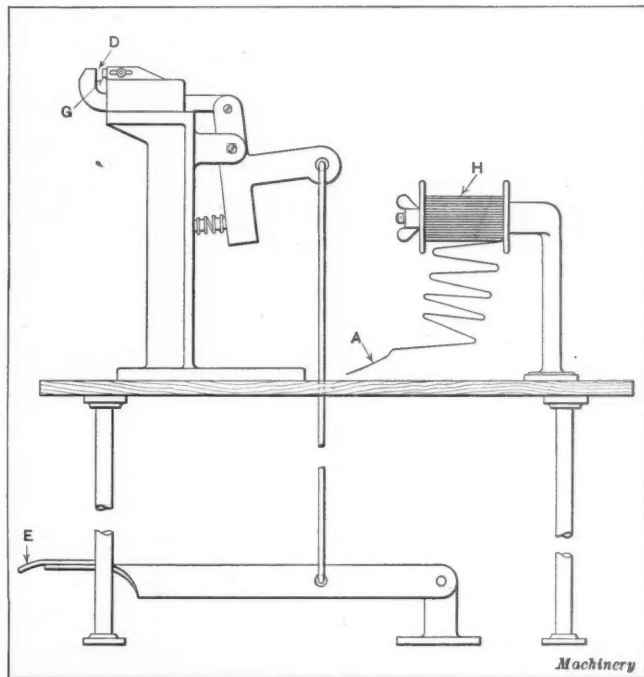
Fixture for clamping Zigzag Filament to Lead-in Wires
